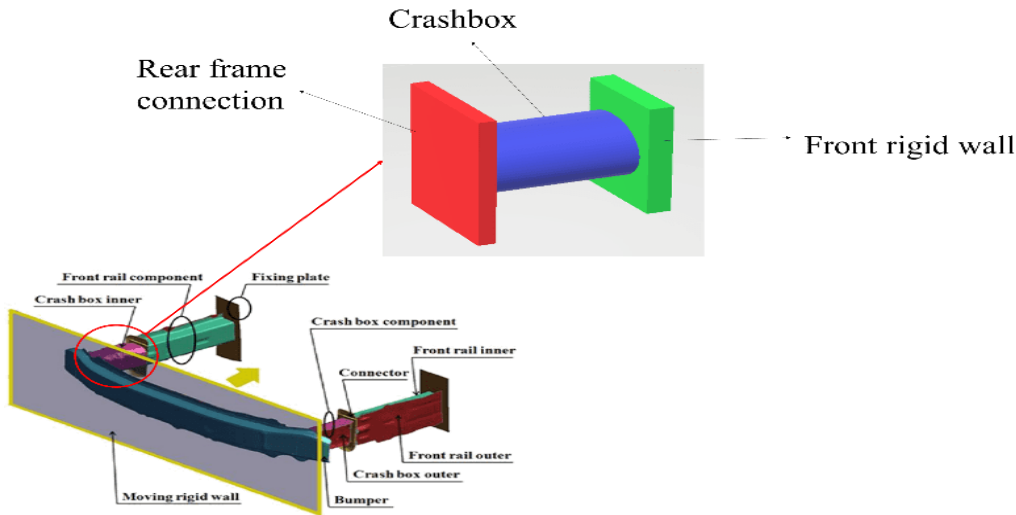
Front end structure of the automobile equipped with components of the crash box.
